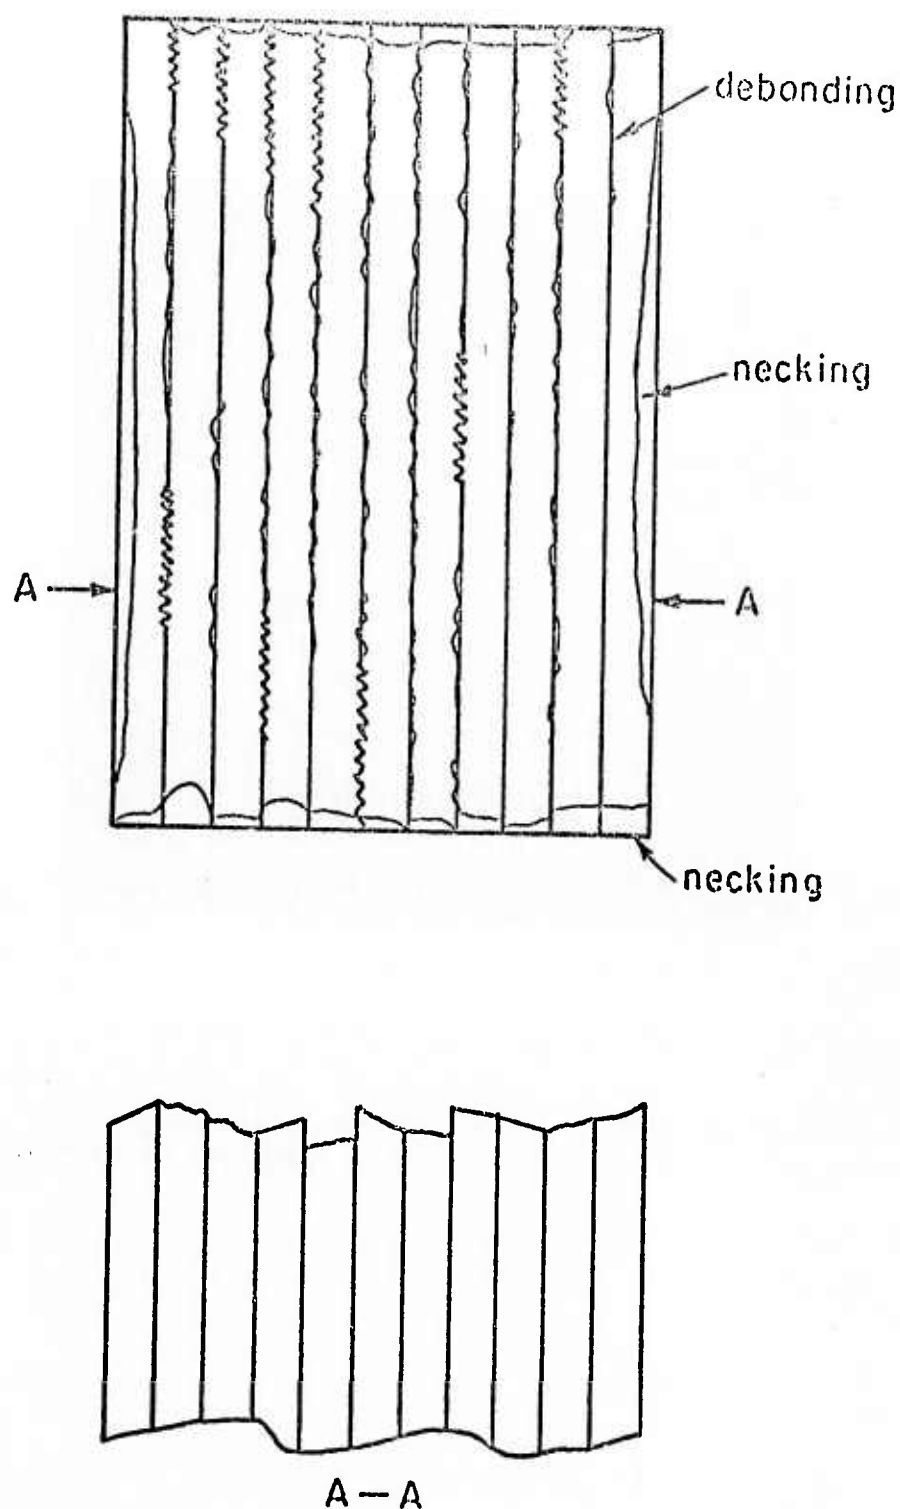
A Schematic Fractograph for Specimen D3P4 ($f_s = 1.00$). Exclusively ductile shear fracture occurred in this specimen. There was about 95% debonding and large amount of necking observed.
